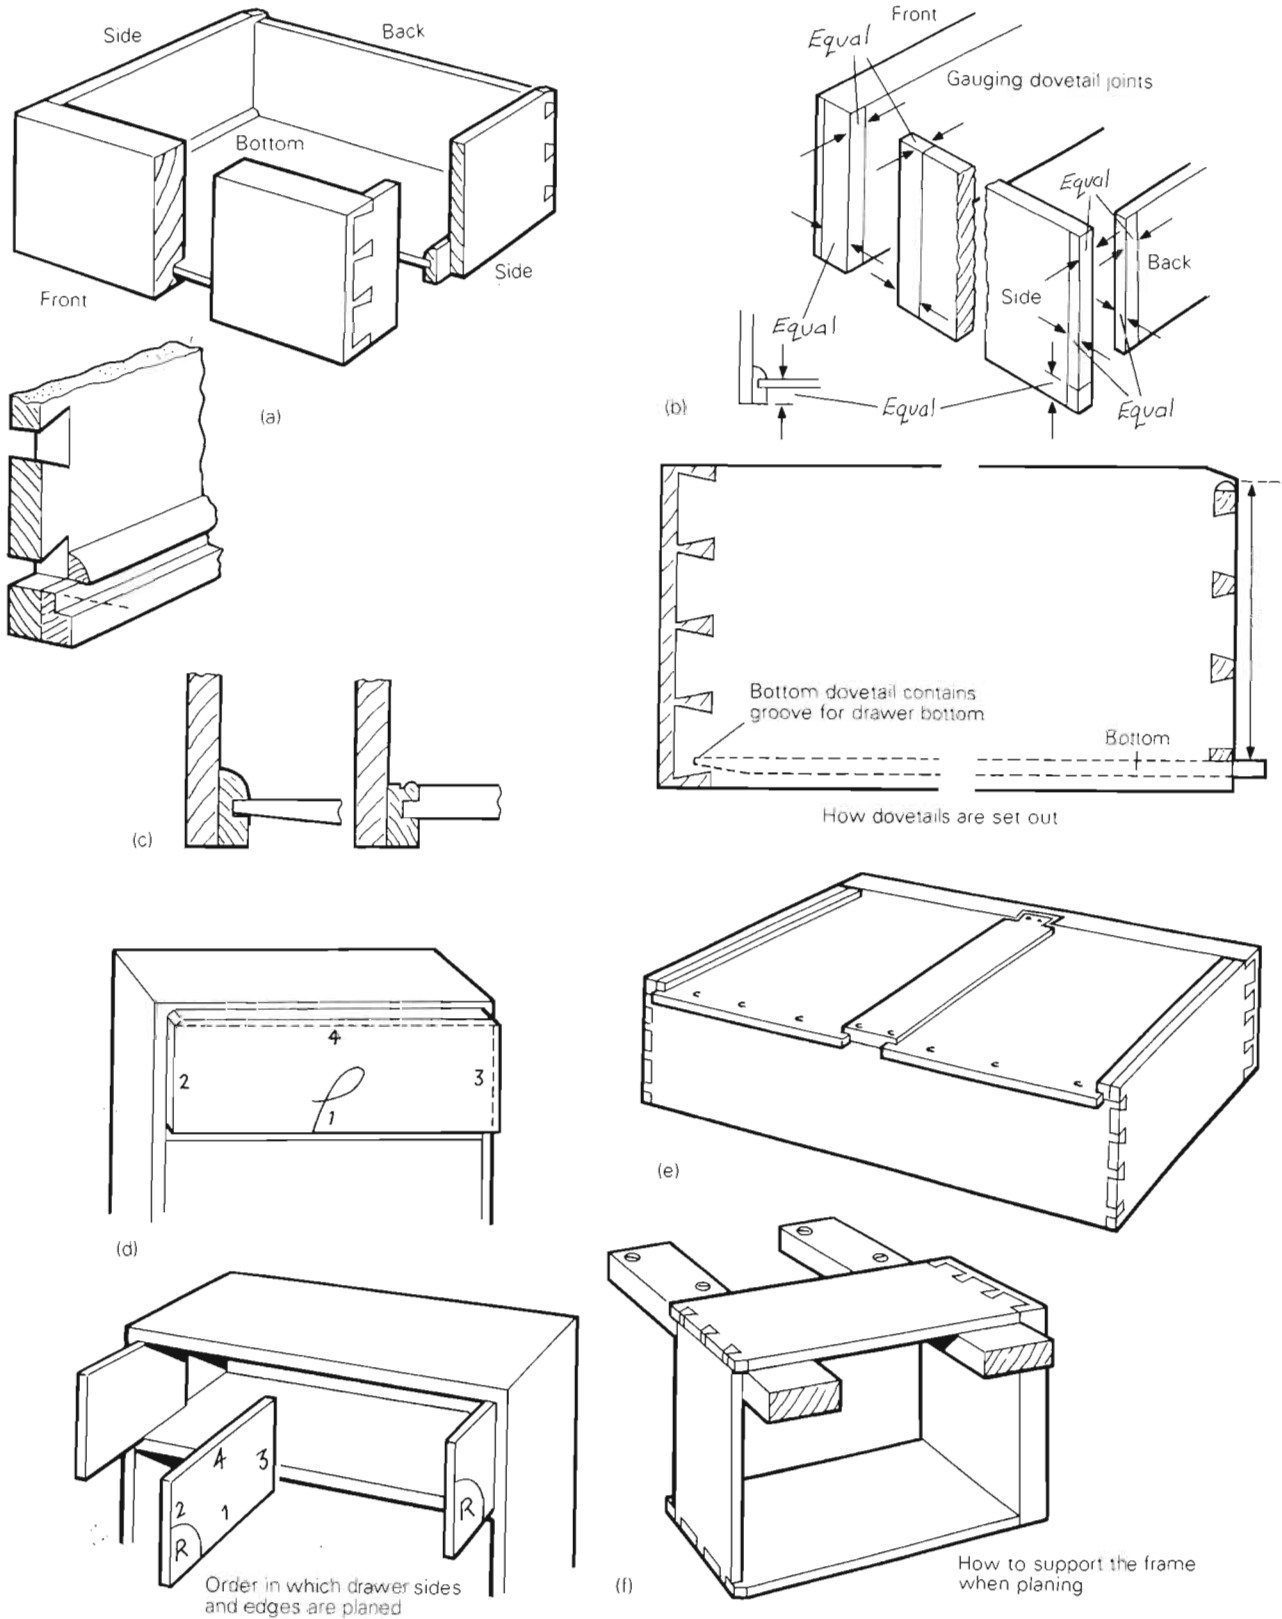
Drawer construction: (a) form of drawer construction, (b) gauging and setting out dovetail joints, (c) slips used for drawer bottom, (d) fitting the front, (e) how to fit the bottom of a long drawer, (f) planing the sides.
